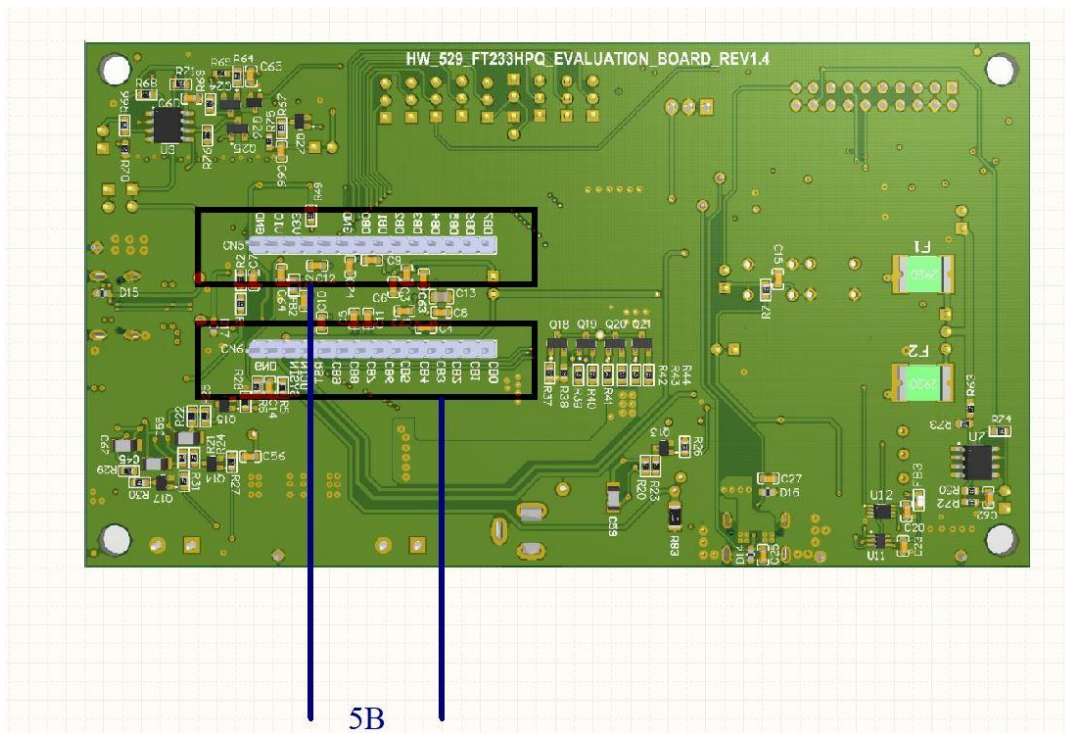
UMFT233HPEV Evaluation Module Board – Bottom View
